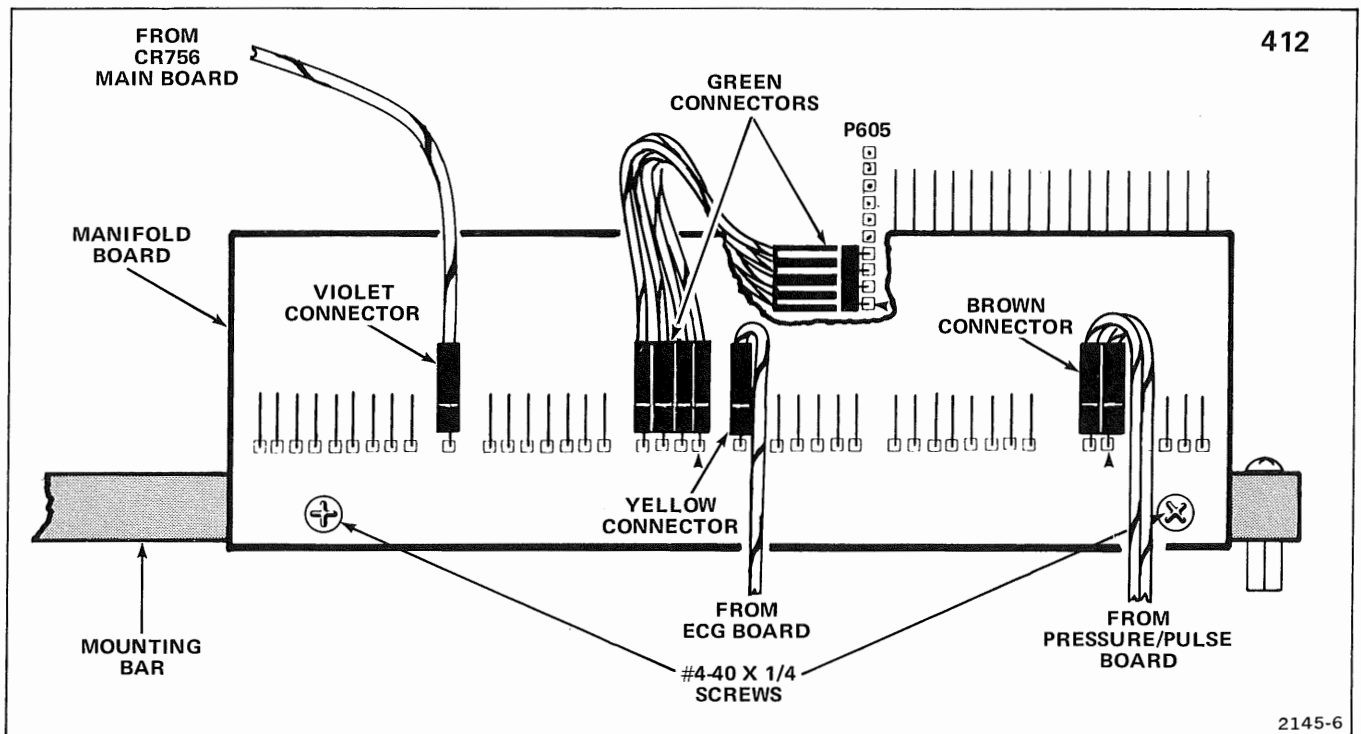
Installing Manifold Board and connecting cables in 412.
